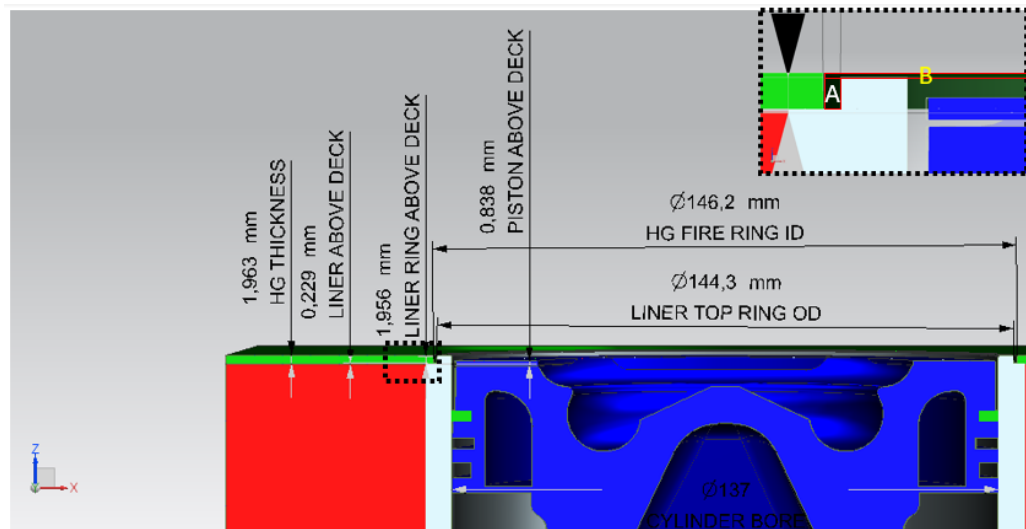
Piston, Head Gasket, and Cylinder Liner Measurements Section View
